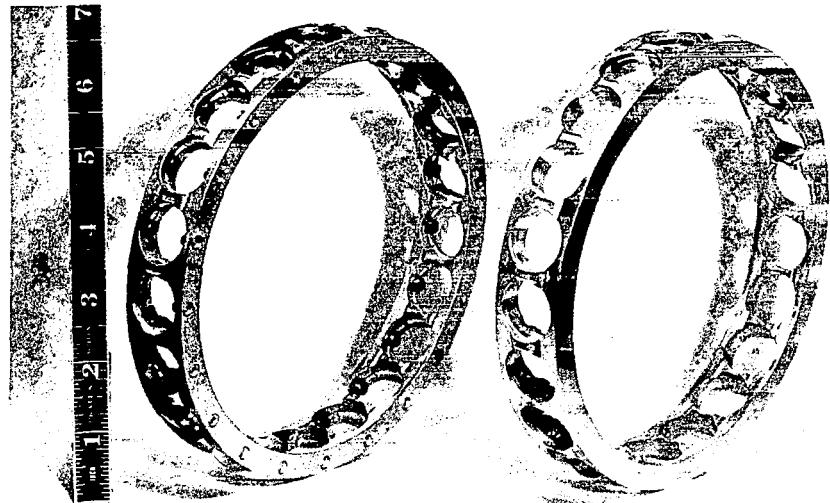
Overall Views of Solid-Ball Cage S/N 2560A-1 and Drilled-Ball Cage S/N 2552A-2
